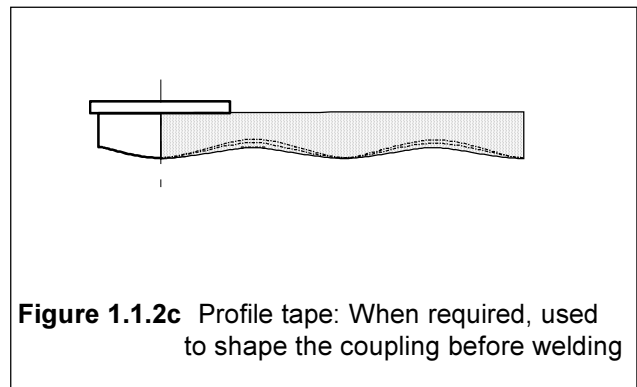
Profile tape: When required, used to shape the coupling before welding
